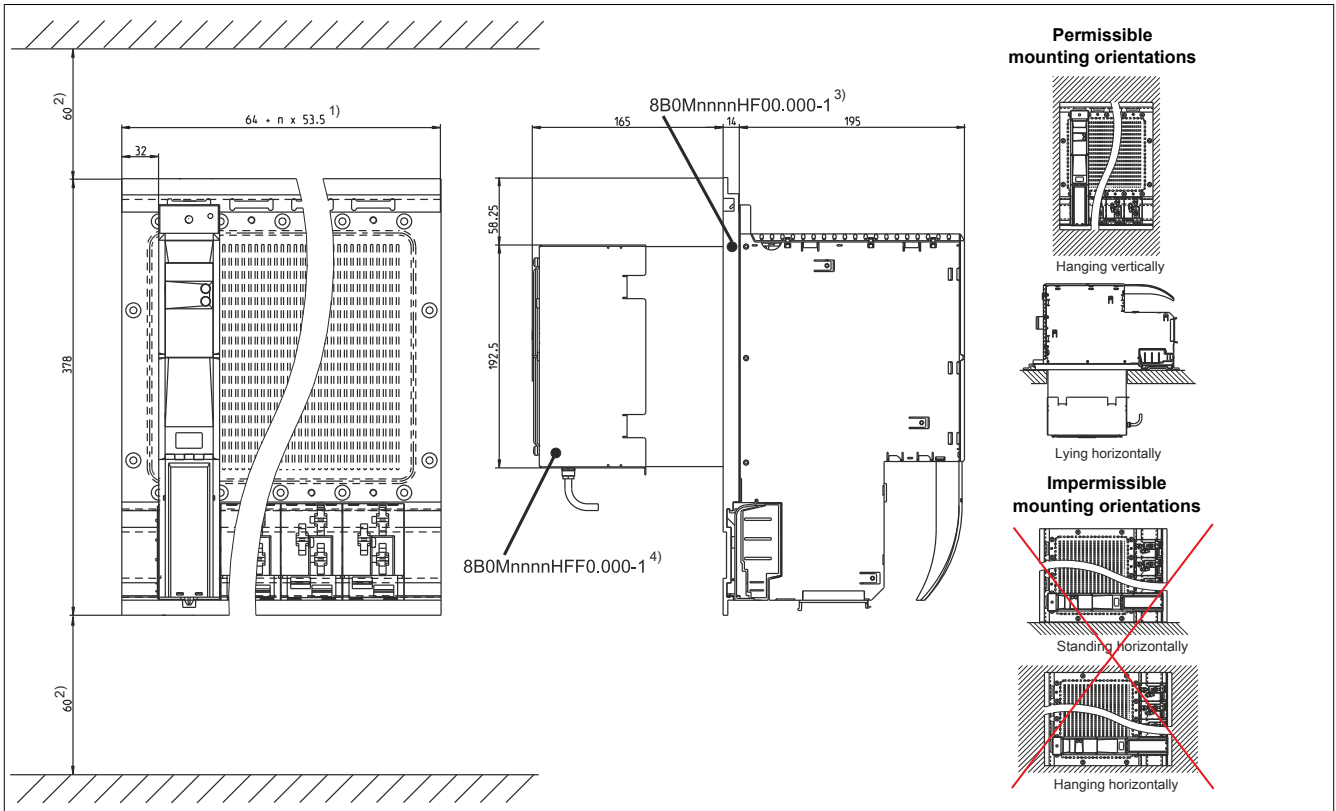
Feed-through mounting - Dimension diagram and installation dimensions
